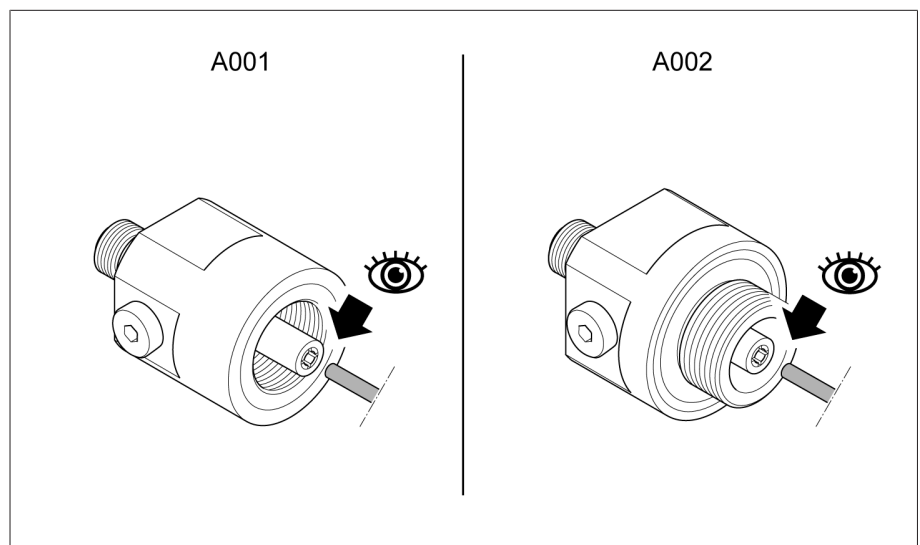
Checking the connection (example illustration bushing adapter A001 and A002)
